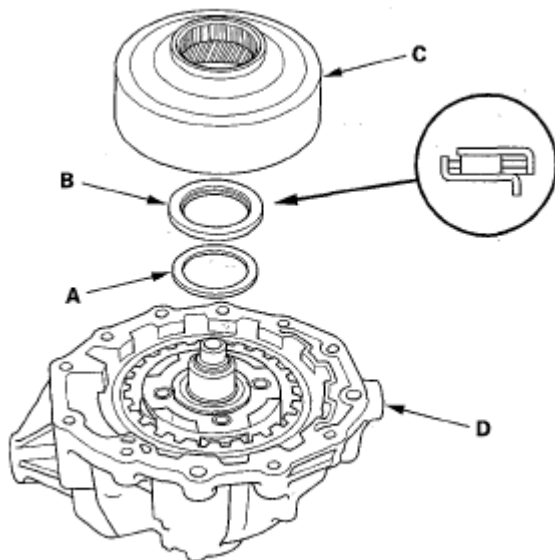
Identifying Ring Gear, Needle Bearing, Rear Differential Side Case And Shim
